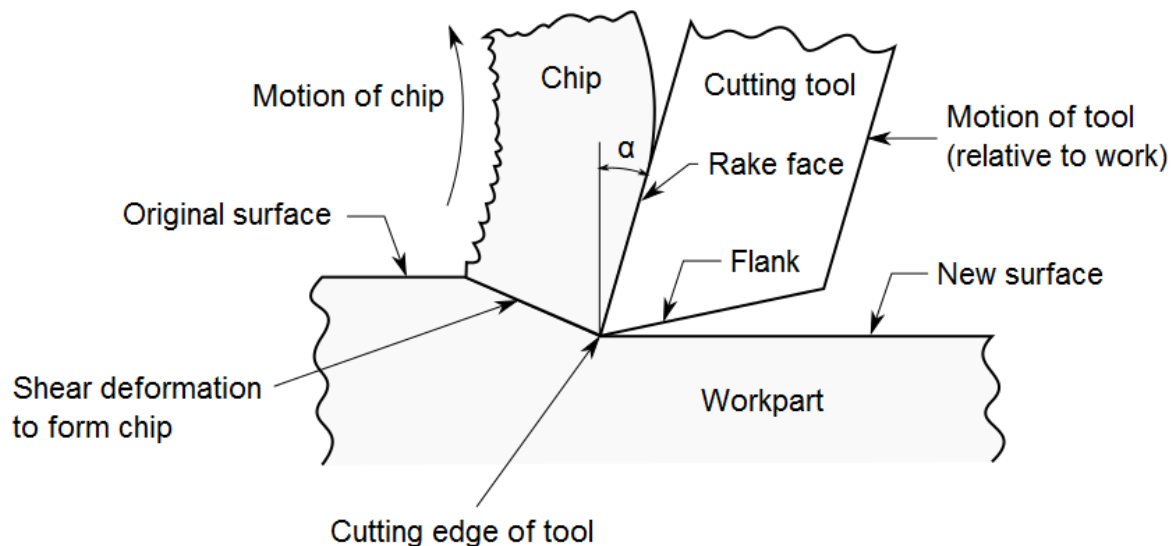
A schematic showing the geometry of a cutting tool insert [2015Url^b]
